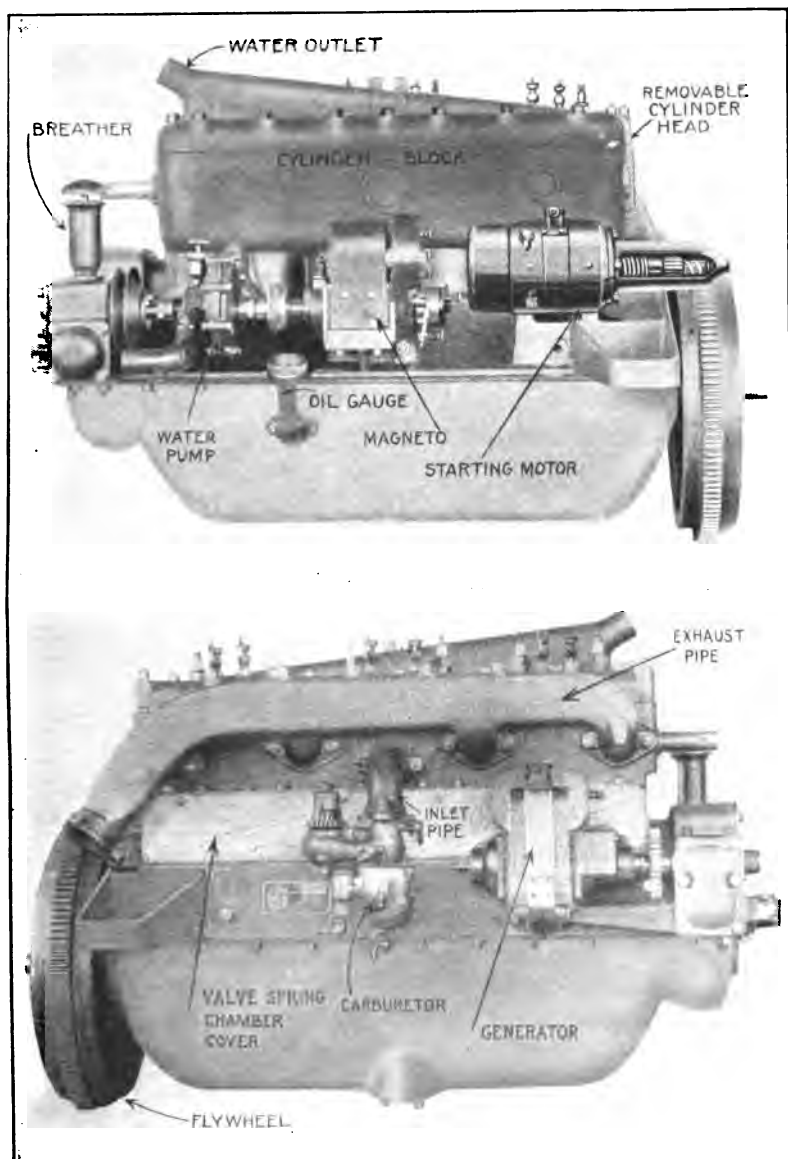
Illustration Showing Location of Starting, Lighting and Ignition Units on the Overland Six Cylinder Engine.
